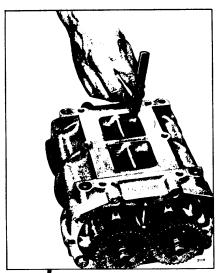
Measuring Rotor Lobe to End Plate Clearance
